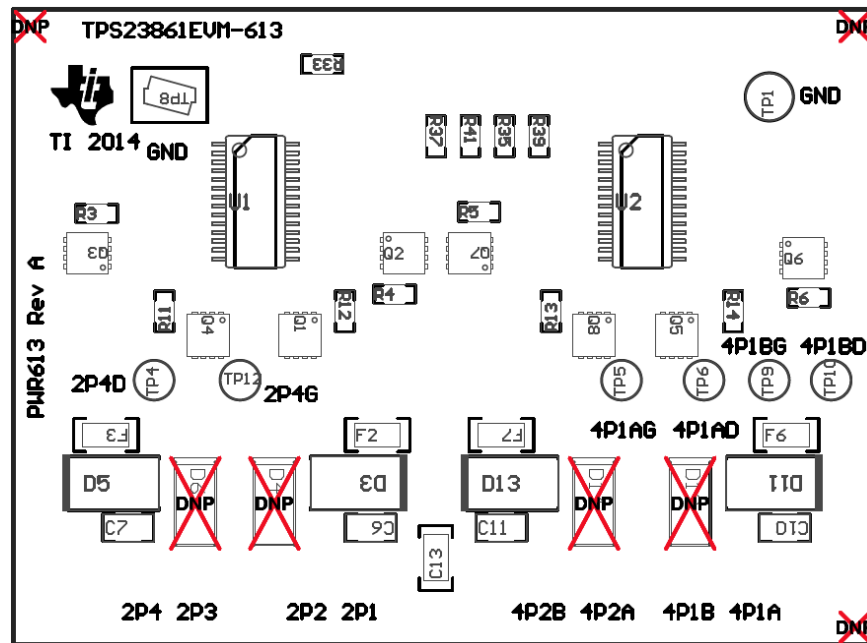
TPS23861EVM-613 (Daughterboard) Top Side Assembly
